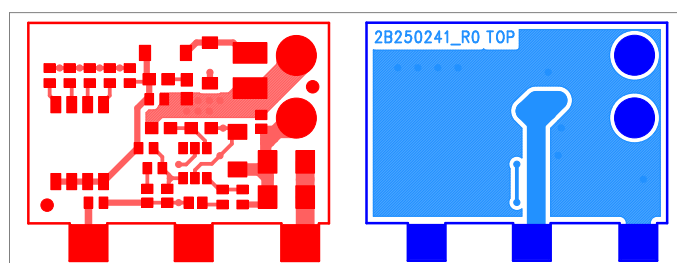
EVLSTACF01UC65- daughterboard PCB layout
